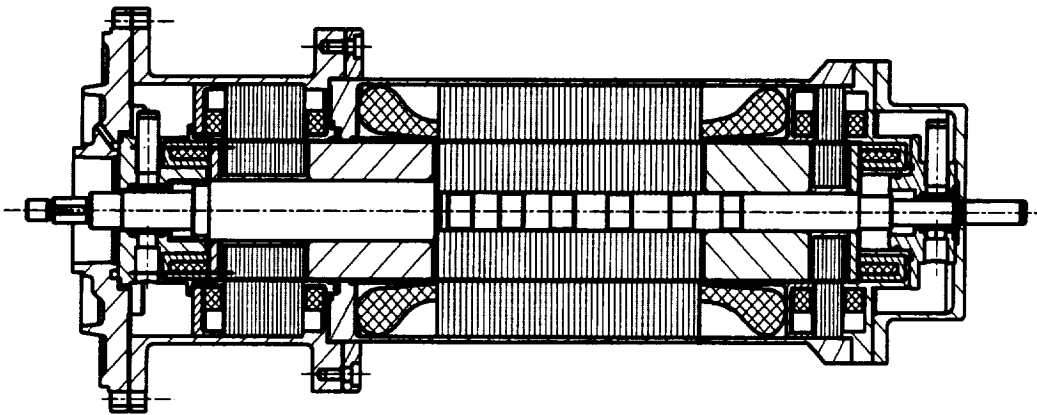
Canned motor pump with two radial and two single-acting axial bearings
